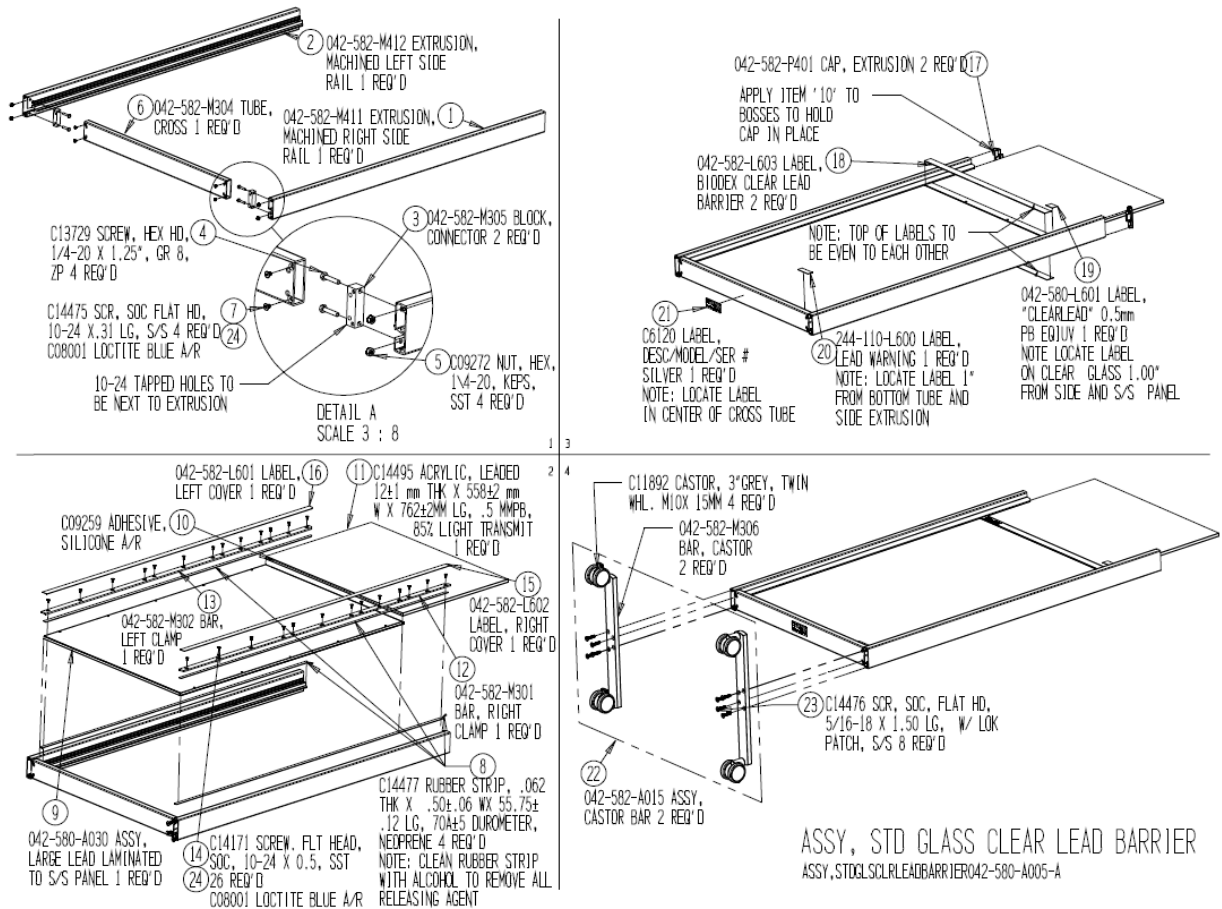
Standard Clear-Lead Mobile Barrier Assembly Drawing
